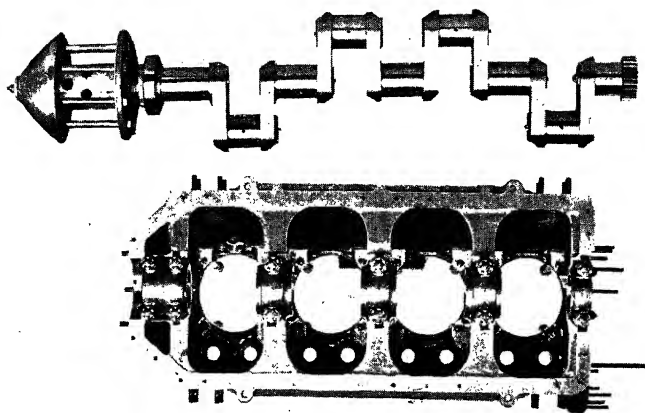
CRANKCASE AND CRANKSHAFT.
